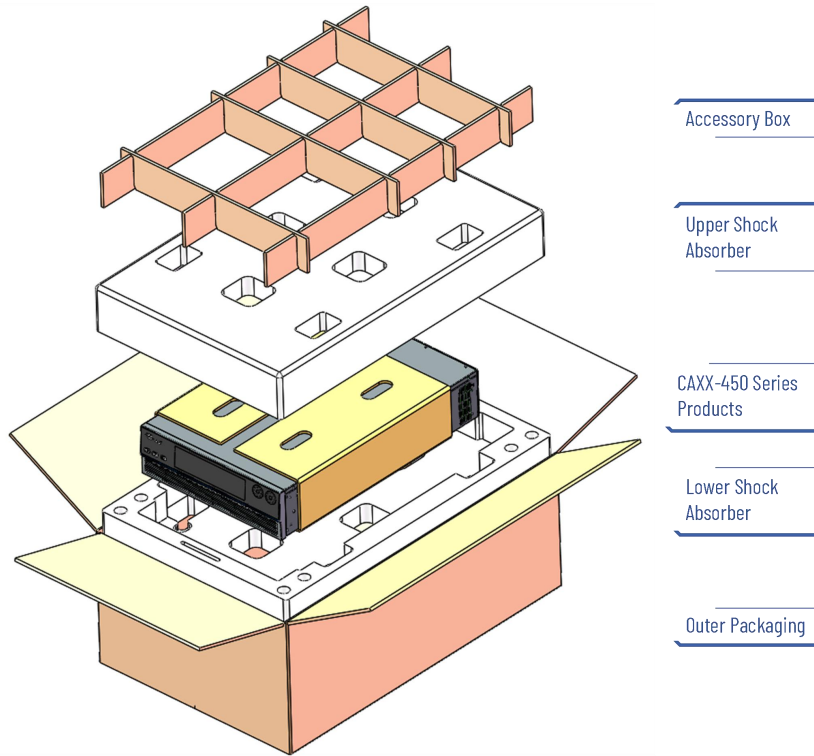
Cortex AC Series Products Packaging Disassembly Diagram
